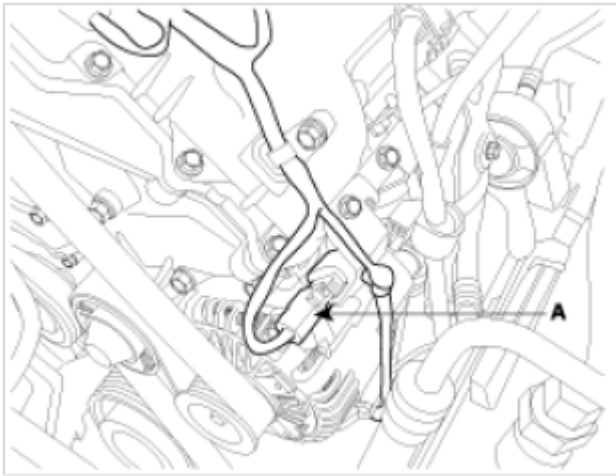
Identifying LH Front Oxygen Sensor Connector
